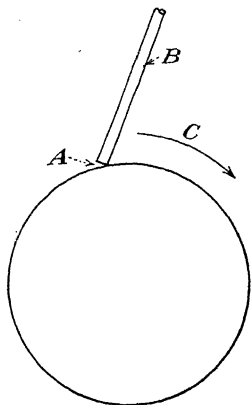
Overhead pipe weld. A. Starting point of weld. B. The electrode. C. Direction of weld.
